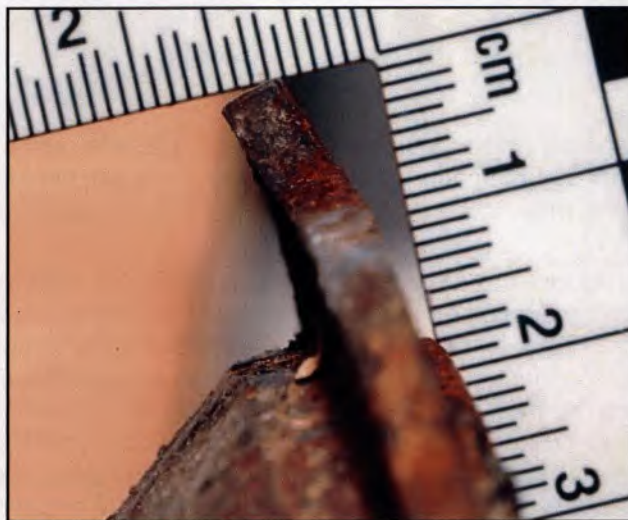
Evidence of deformation of the main gearbox input adaptor flange.
